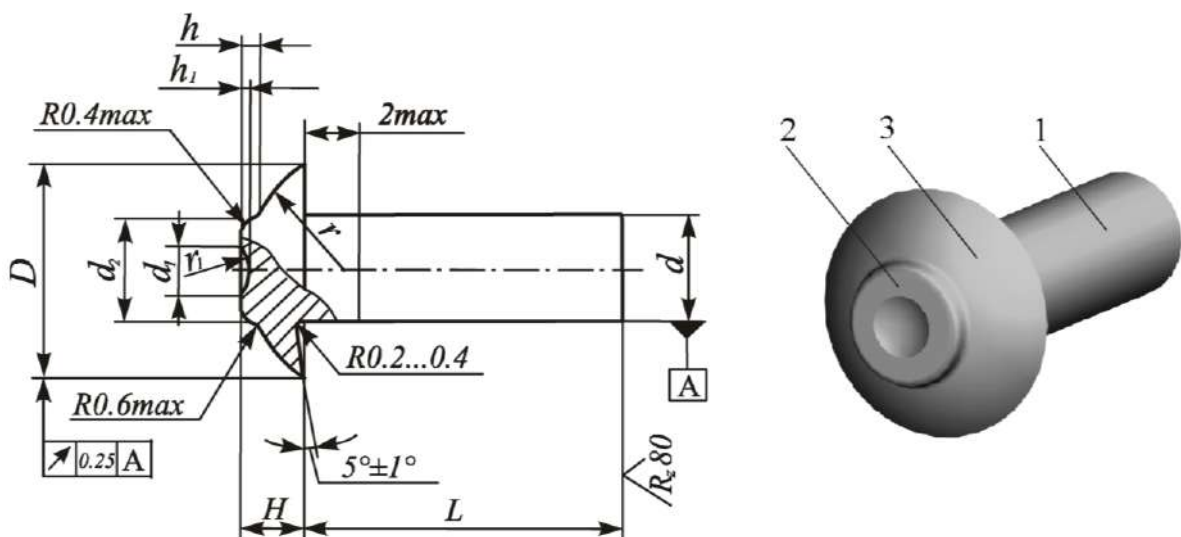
Flat-round head rivet and compensator by OCT 1 34040-79
